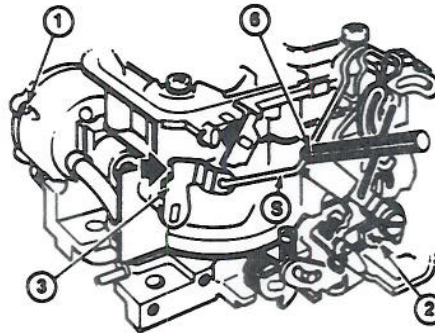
Choke coil lever adjustment w/dual tang lever. 2SE & E2SE carburetors
